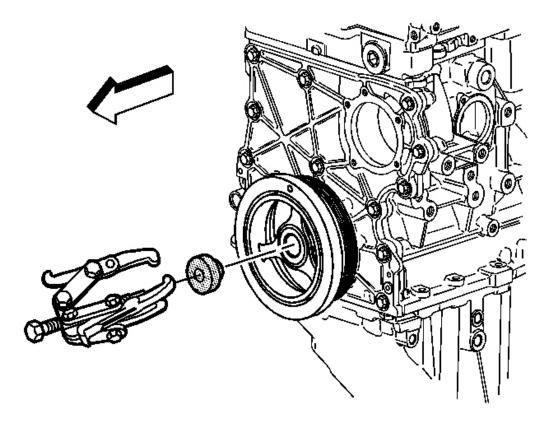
Removing The Crankshaft Balancer Using J 41816-2 Courtesy of GENERAL MOTORS CORP.
